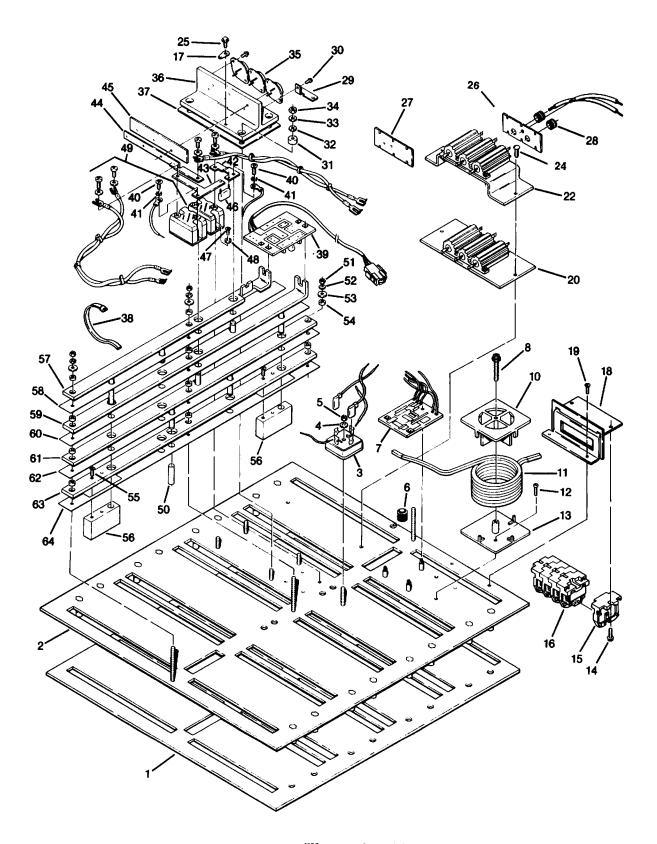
Bus Bar and Heat Sink Exploded View
